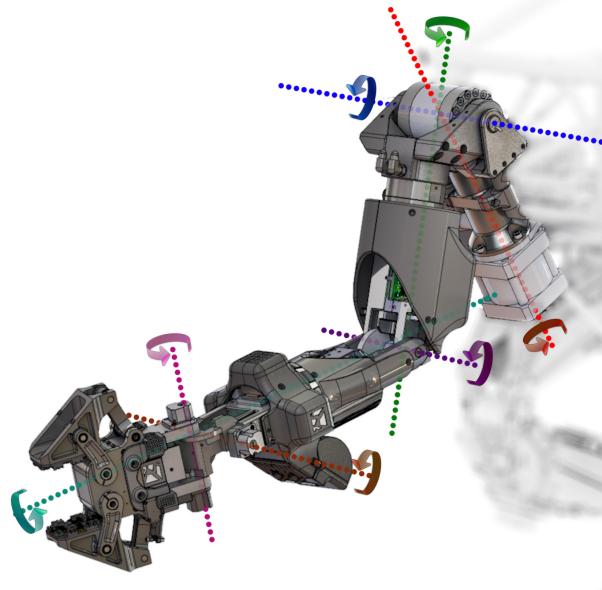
The hydraulic manipulator has seven rotational degrees of freedom (three shoulder, one elbow, three wrist), and a parallel jaw gripper mechanism.
